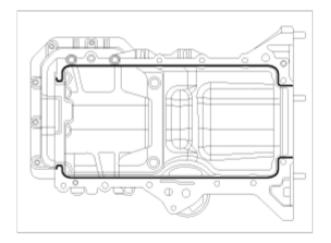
Identifying Sealant Applying Areas On Ladder Frame Courtesy of HYUNDAI MOTOR AMERICA
